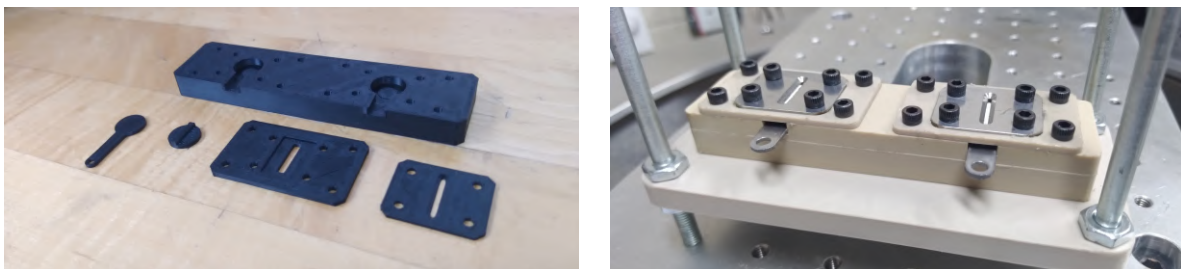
VET module 3D printed prototype (LHS) and fully-fabricated assembly (RHS).
